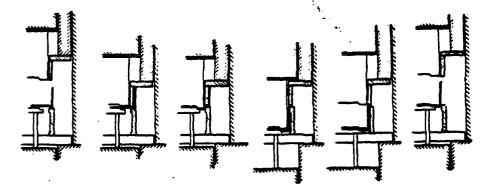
Redrawing on the double-action press with the use of a lower pressing mechanism.
